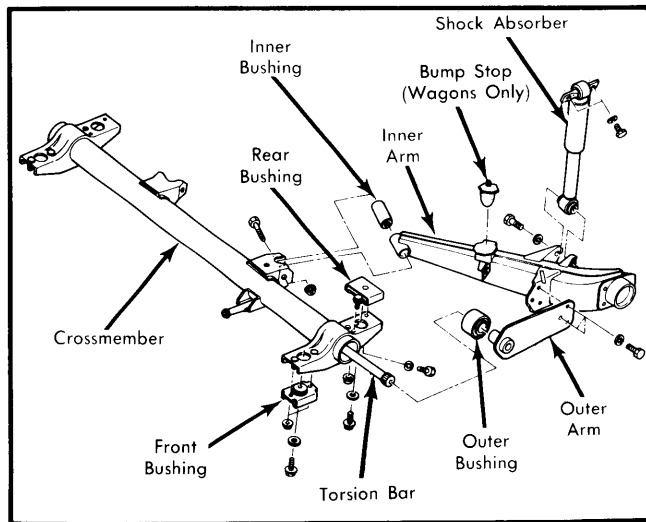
Subaru Rear Suspension Components (2-Wheel Drive Shown; 4-Wheel Drive Similar)
